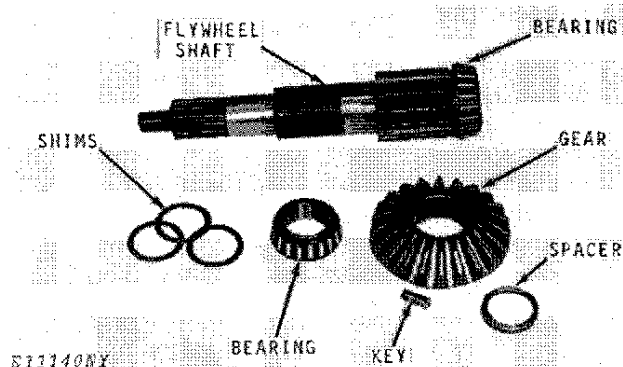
Removing Gear, Bearings and Shims from Flywheel Shaft
